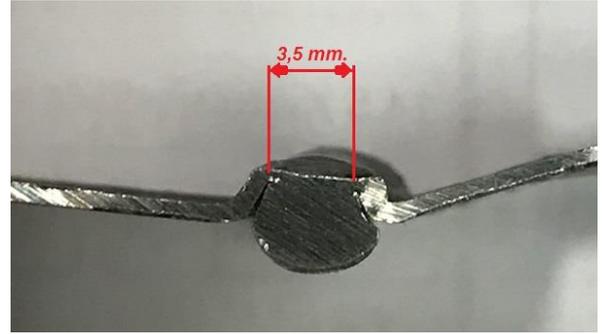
Cross-section through the weld which fasten lamella to the axis of rotation, after plastic deformation initiating the breaking process.
